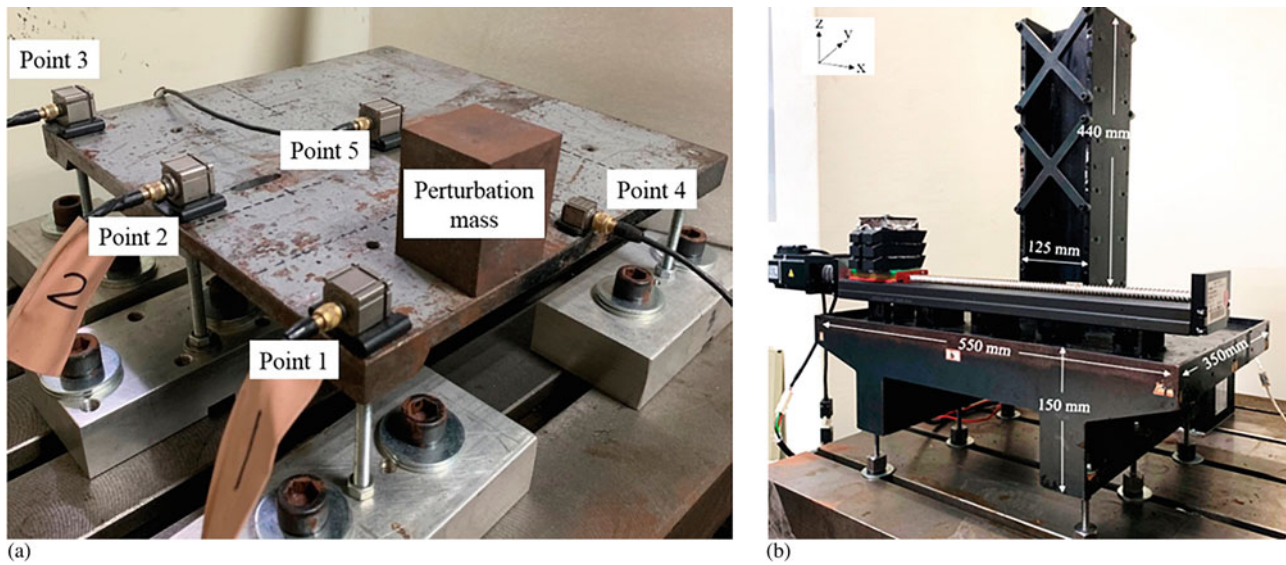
Objects modelled in this study: (a) Plate-footings assembly. (b) Machine tool prototype
